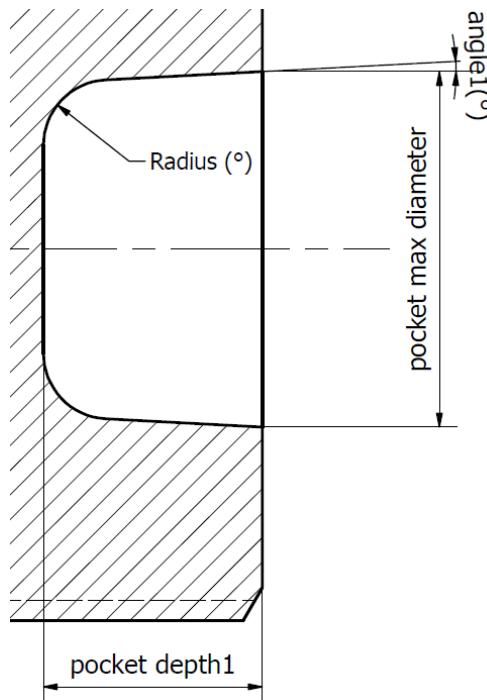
Dimension of pocket on the bottom side of a locking bolt generally described.
